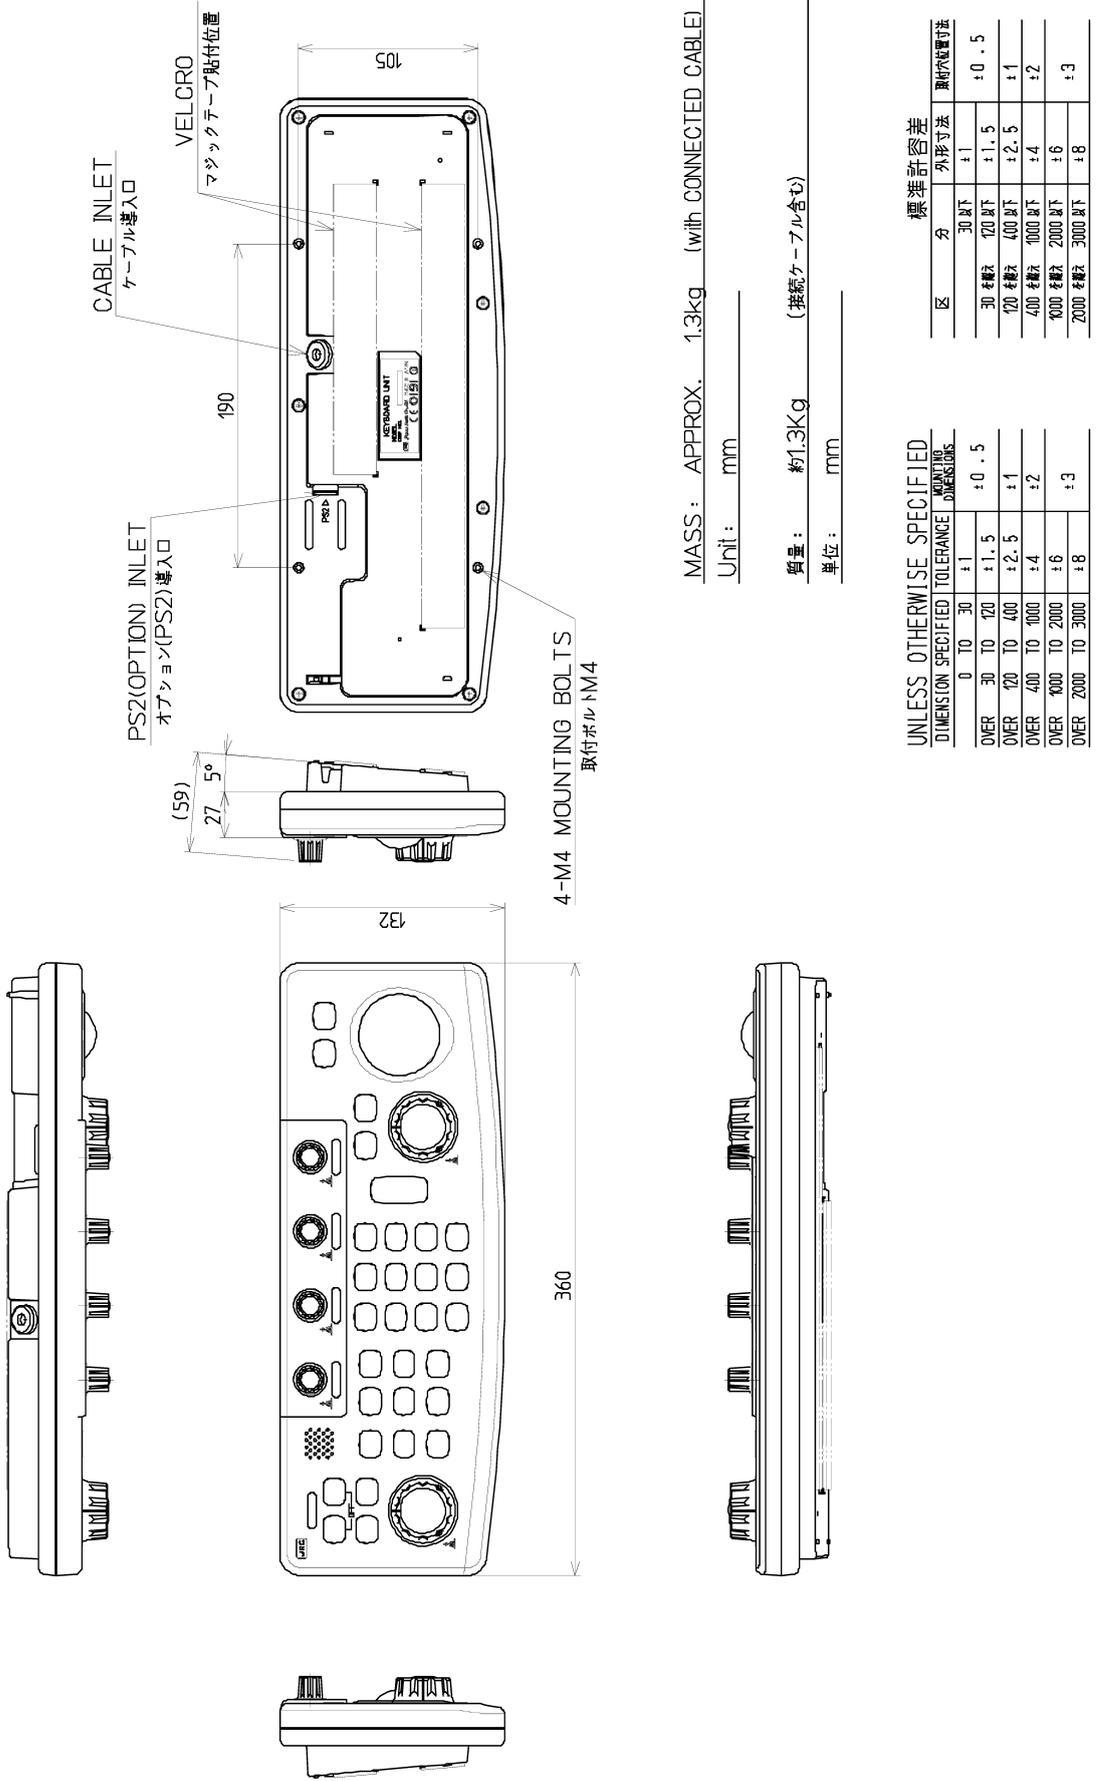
Exterior Drawing of Operating Unit, Type NCE-7699
